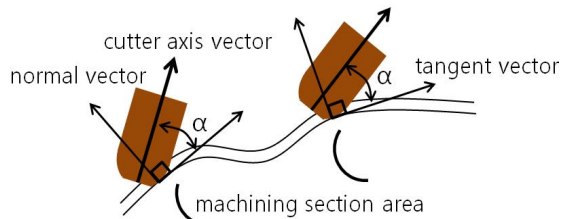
Comparison of machining sections of roller gear cam and ball gear cam
